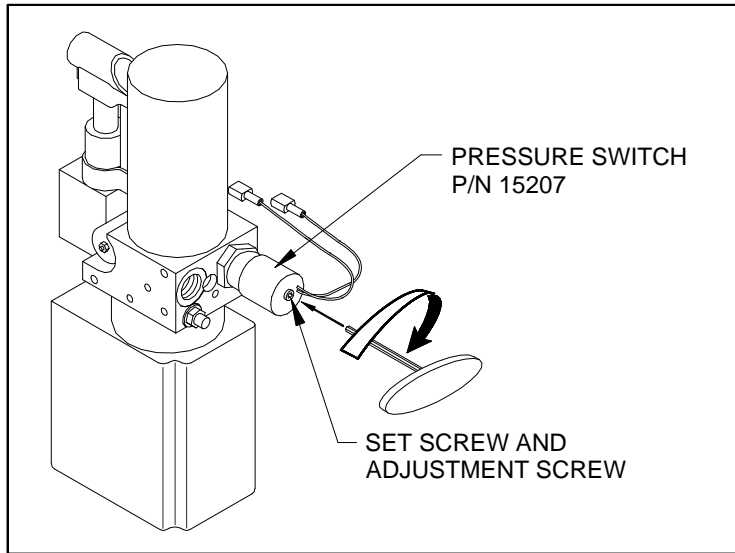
HYDRAULIC PUMP WITH PRESSURE SWITCH
